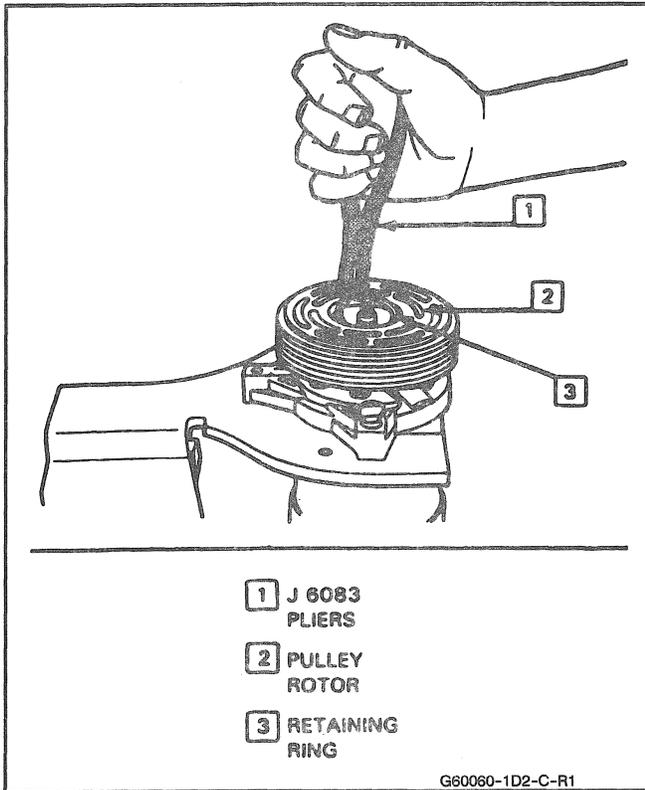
Installing-Removing Pulley Rotor & Bearing Assembly Retaining Ring
